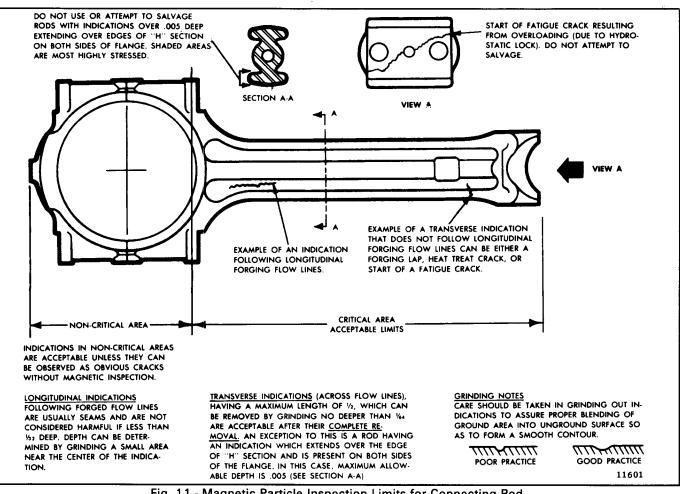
Magnetic Particle Inspection Limits for Connecting Rod
